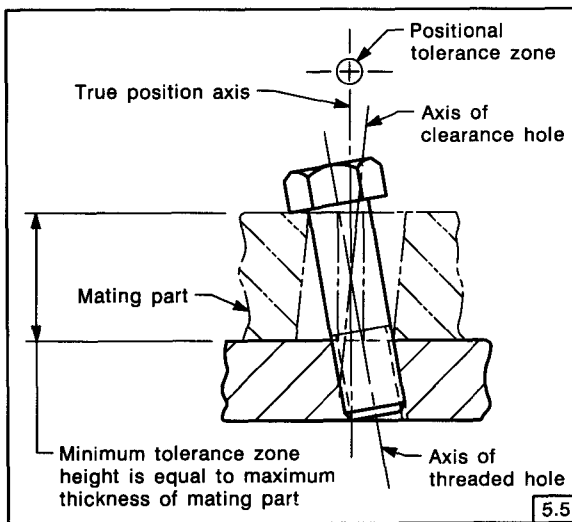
BASIS FOR PROJECTED TOLERANCE ZONE
